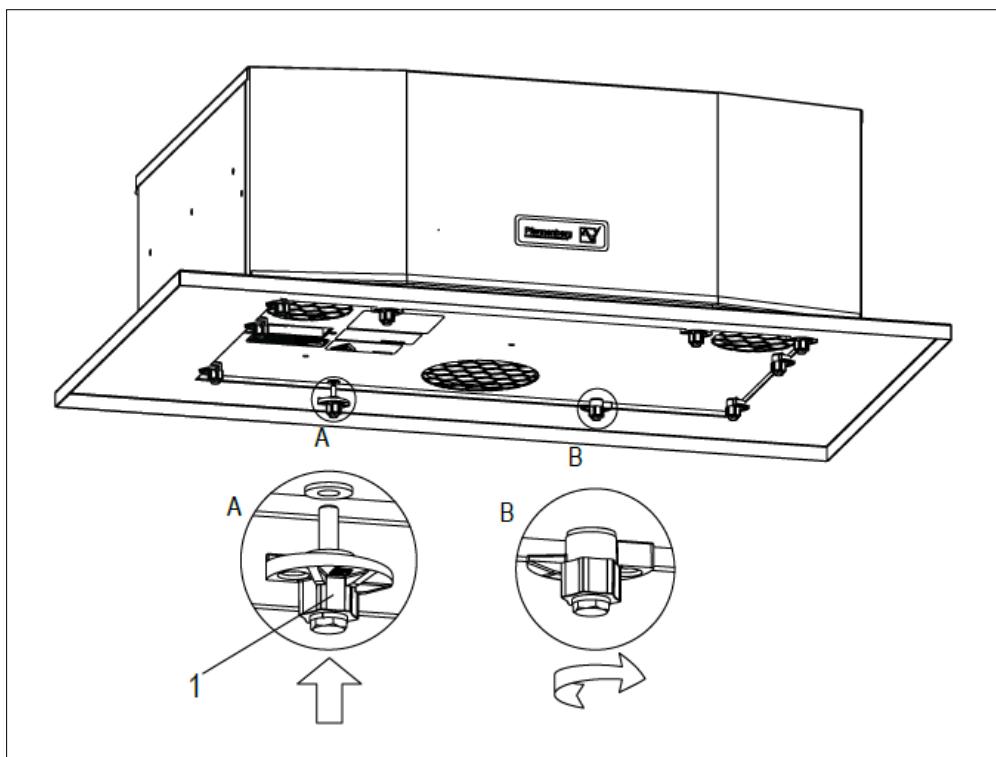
Assembly of air/water heat exchangers with sash fasteners
